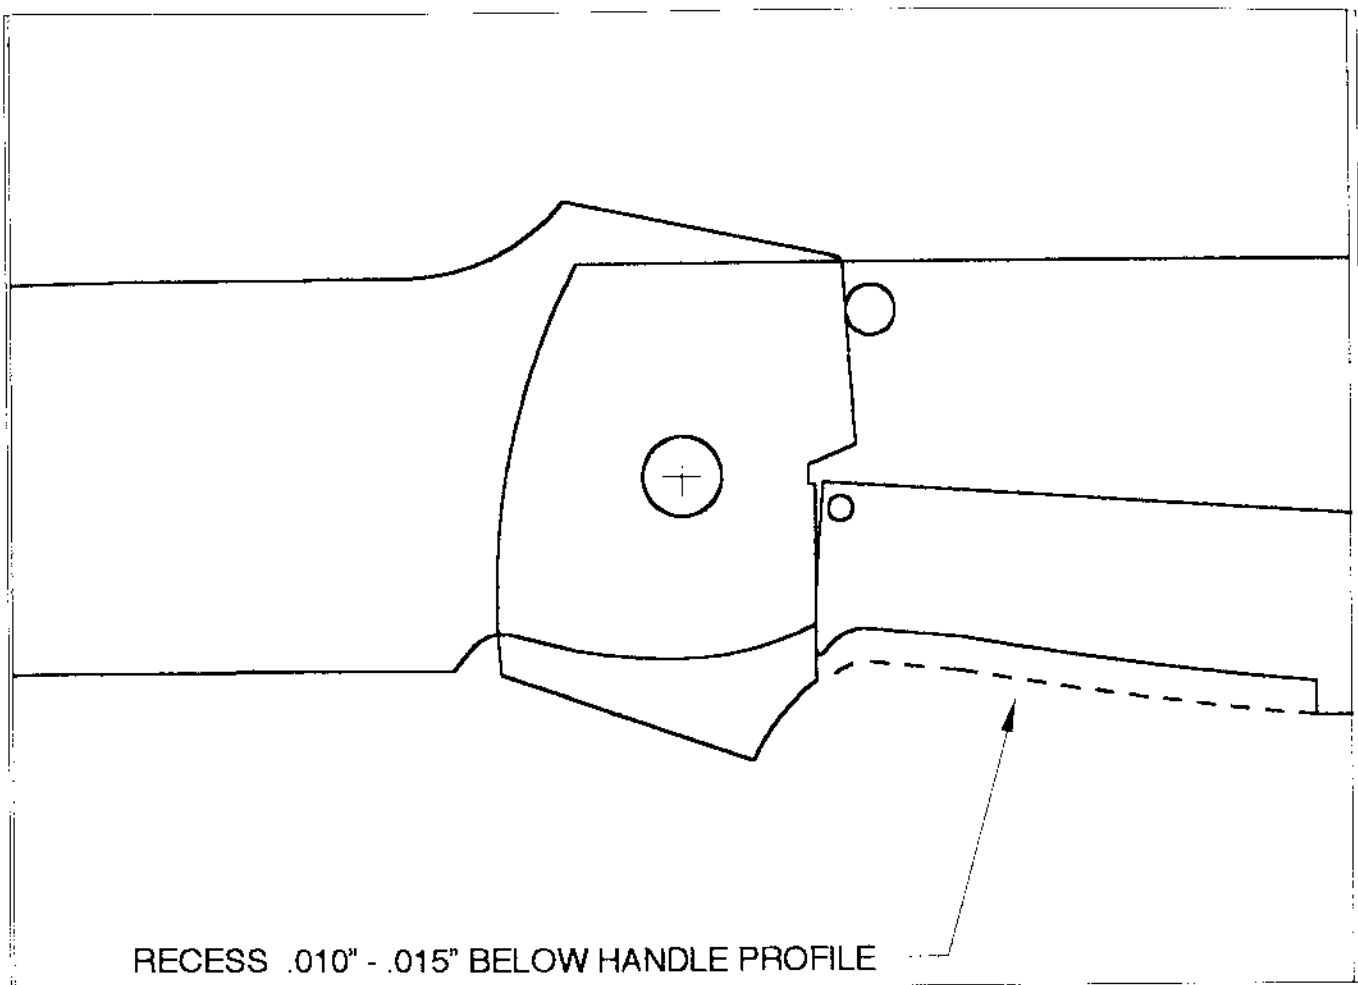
Recessing the spring bar below the level of the handle's profile will minimize accidental unlocking with some tight grips.
